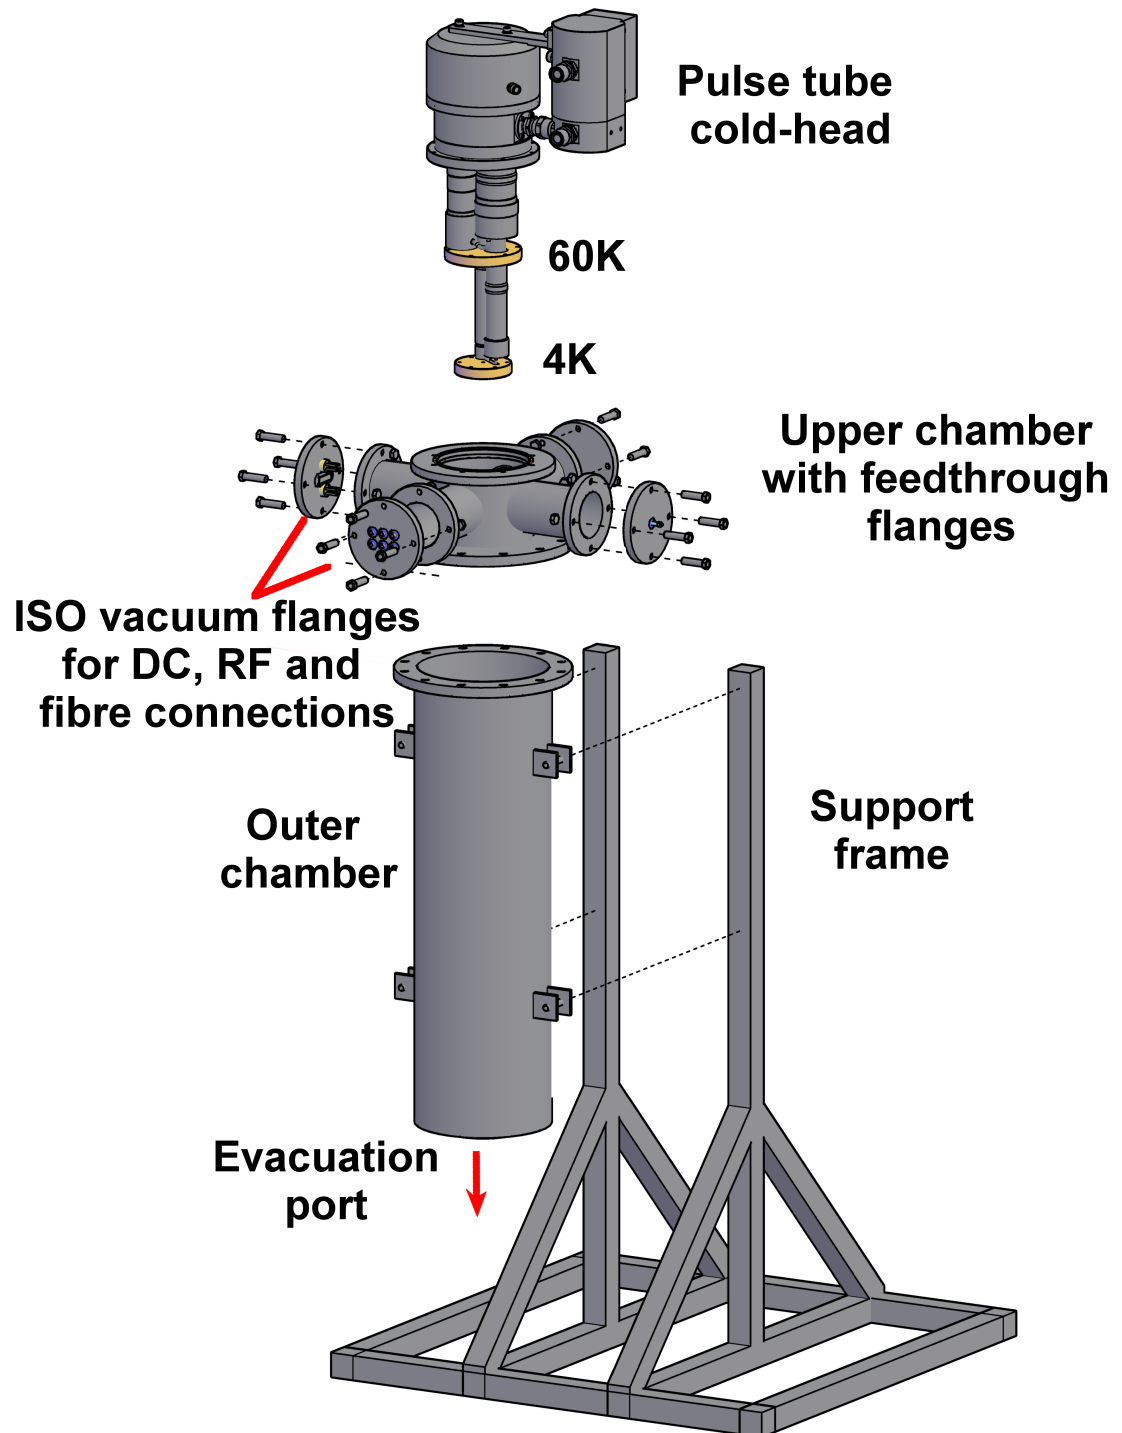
Exploded view of the two main chambers, feedthrough flanges and mountings. The top chamber and coldhead are removed together, with an electric hoist mounted on the ceiling.
